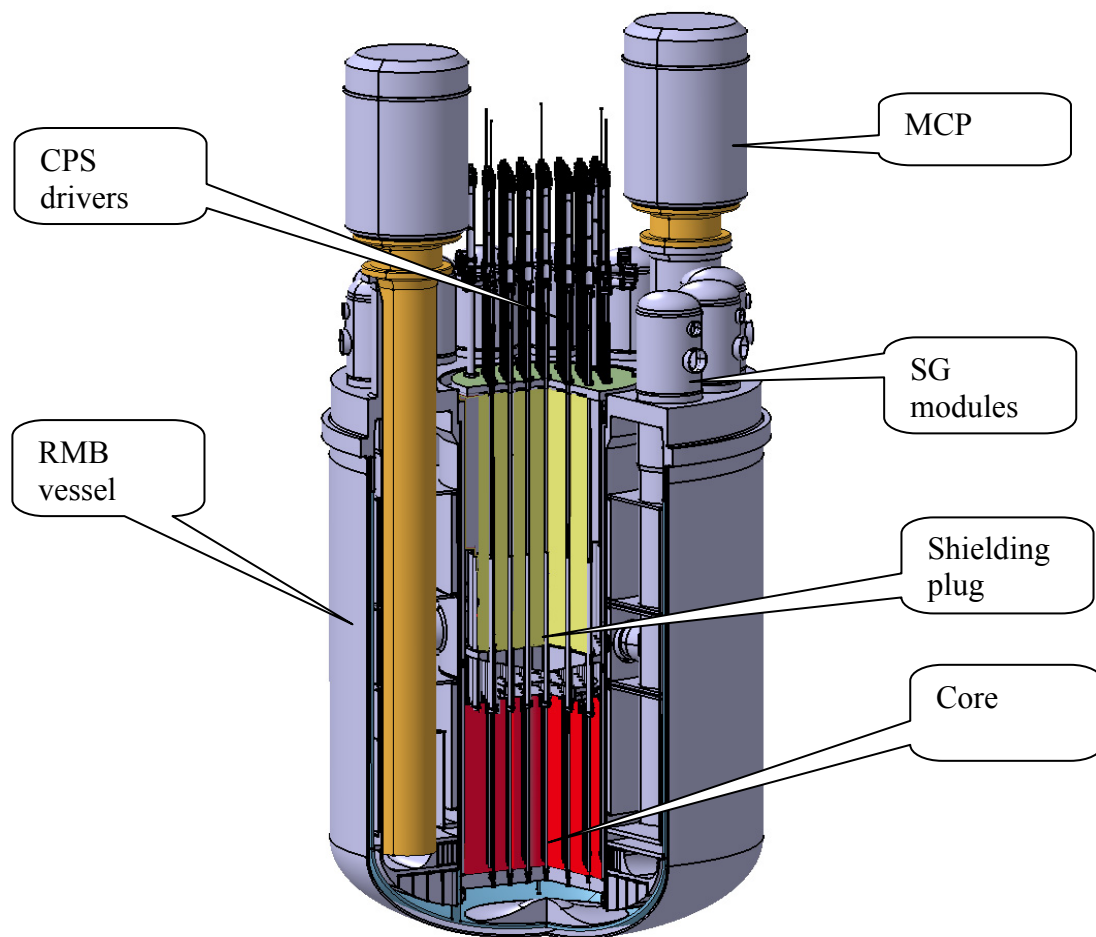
Equipment arrangement in the RMB vessel of SVBR-75/100.
